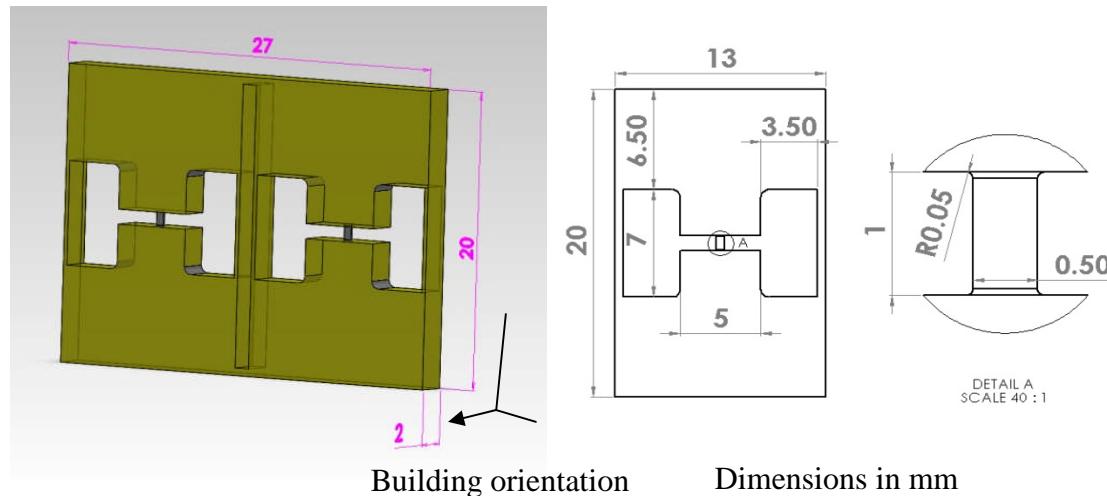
A typical fabrication cells with central test cross-section of 1/0.5/0.1 mm (L/W/T) (Left: building cell; Right: individual specimen cell)
